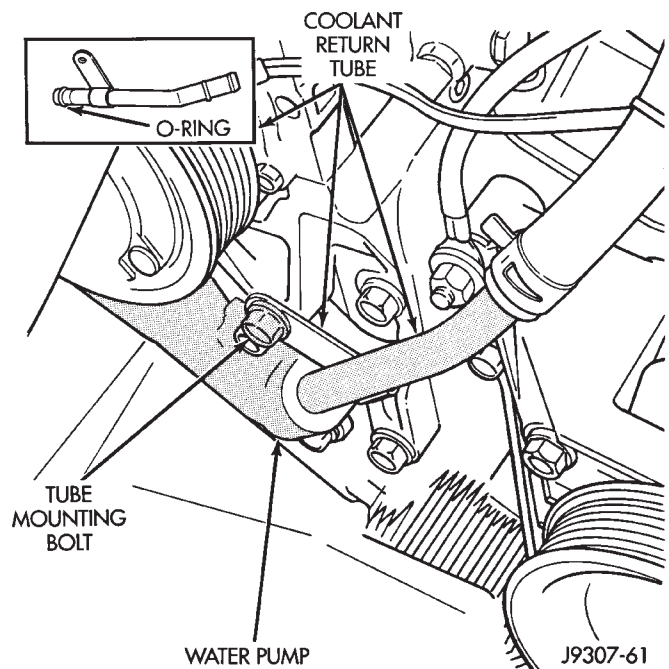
Coolant Return Tube—5.9L HDC-Gas Engine
